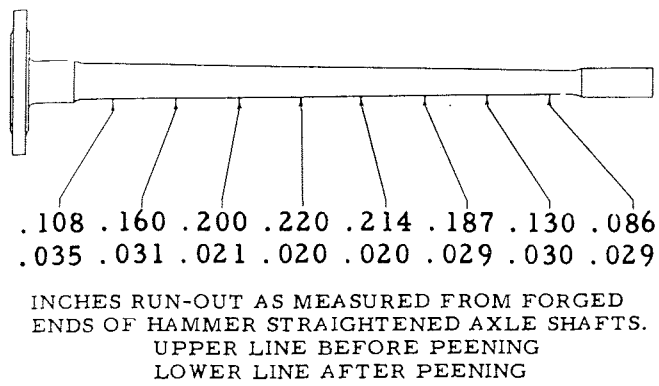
Inches run-out as measured from forged ends of hammer-straightened axle shafts. Upper line, before peening; lower line, after peening.
